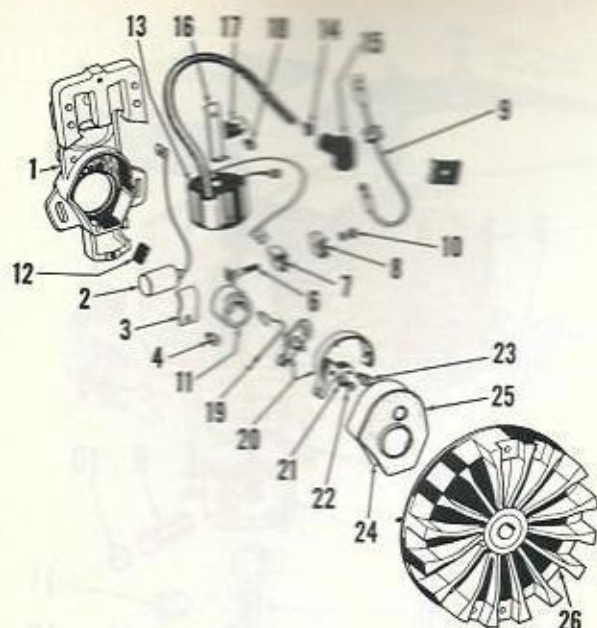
Exploded view of magneto with adjustable ignition timing as used on some later models. Refer to Fig. SK12 for view of magneto and backing plate showing timing marks.
